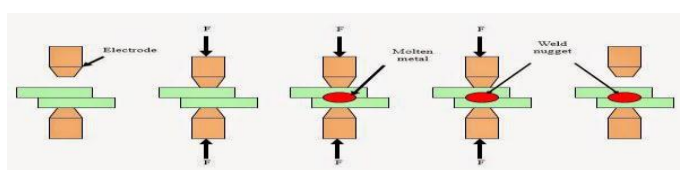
Steps of Resistance Spot Welding Process.
